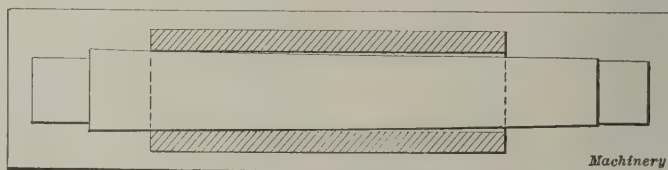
Improper Fit of Bushing on Ordinary Arbor
